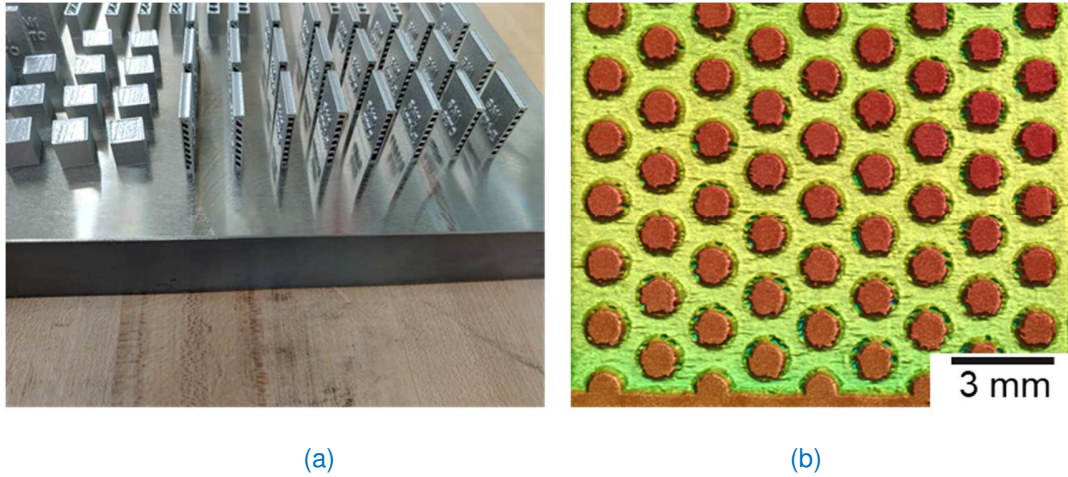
a) Test cubes and as-built micro pin arrays residing on the build plate. b) The cross-sectional height profiles of the 1.2mm diameter pin array printed using laser parameters of 250 W and 959 mm/s with a hatch spacing of 0.11mm
